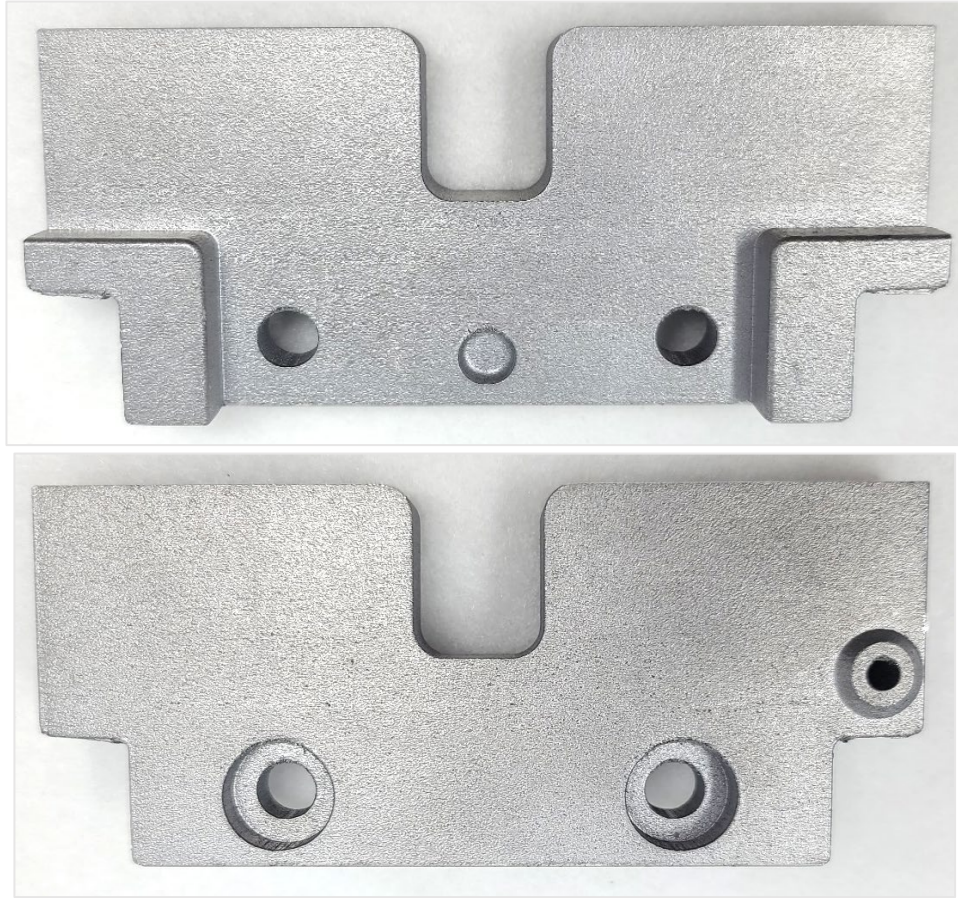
Photographs of heater with as-printed surface finish (top) and supports removed (bottom).
